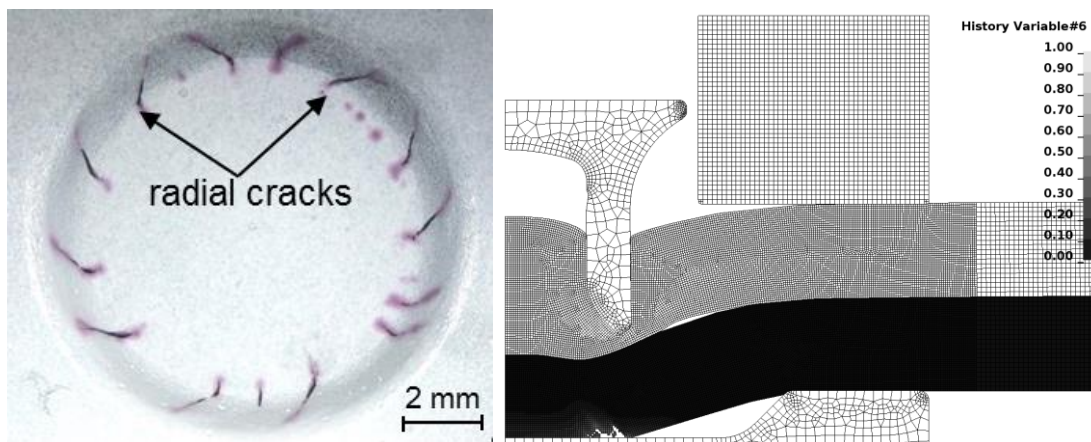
SPR joint with chamfered die. Left: Color penetration test of closing head showing radial cracks, right: Damage values of the model in the aluminum die casting at error termination with too early crack start.
